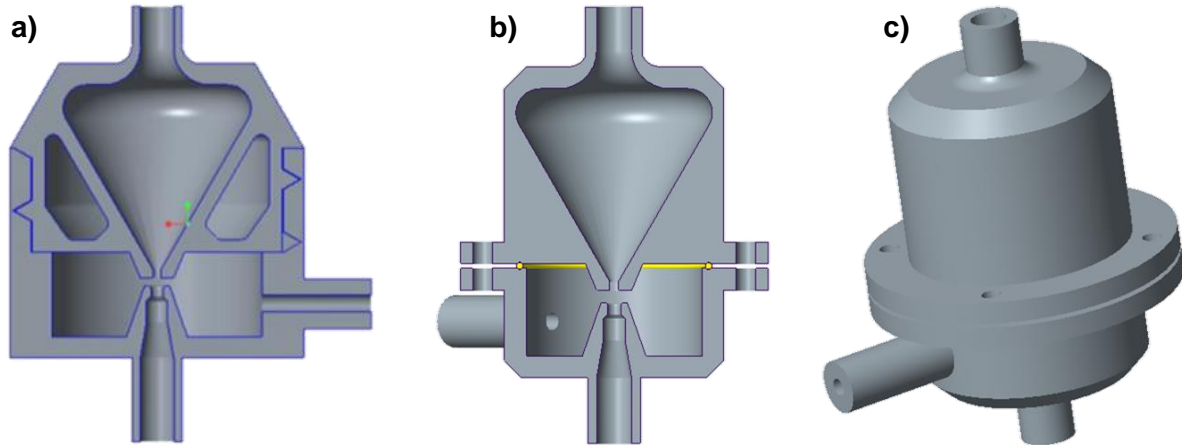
Virtual impactor | a) cross-section of the previous design; b) cross-section of the improved design; c) full view of the improved design
